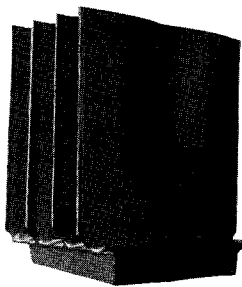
SECTION OF RADIATOR SHOWING JOINTS FORMED WITH OUTSIDE WELDS
